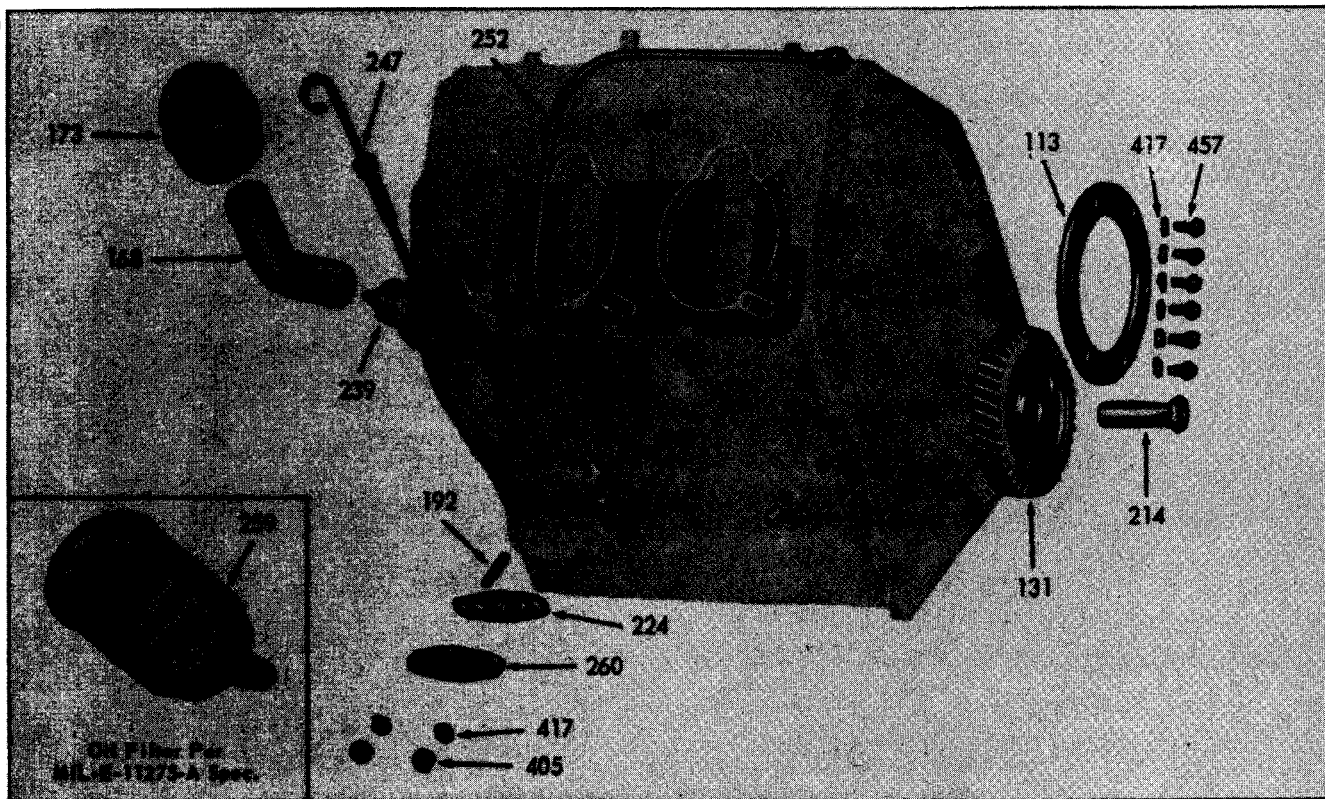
, IDLER GEAR AND OIL FILLER MOUNTING GROUP
